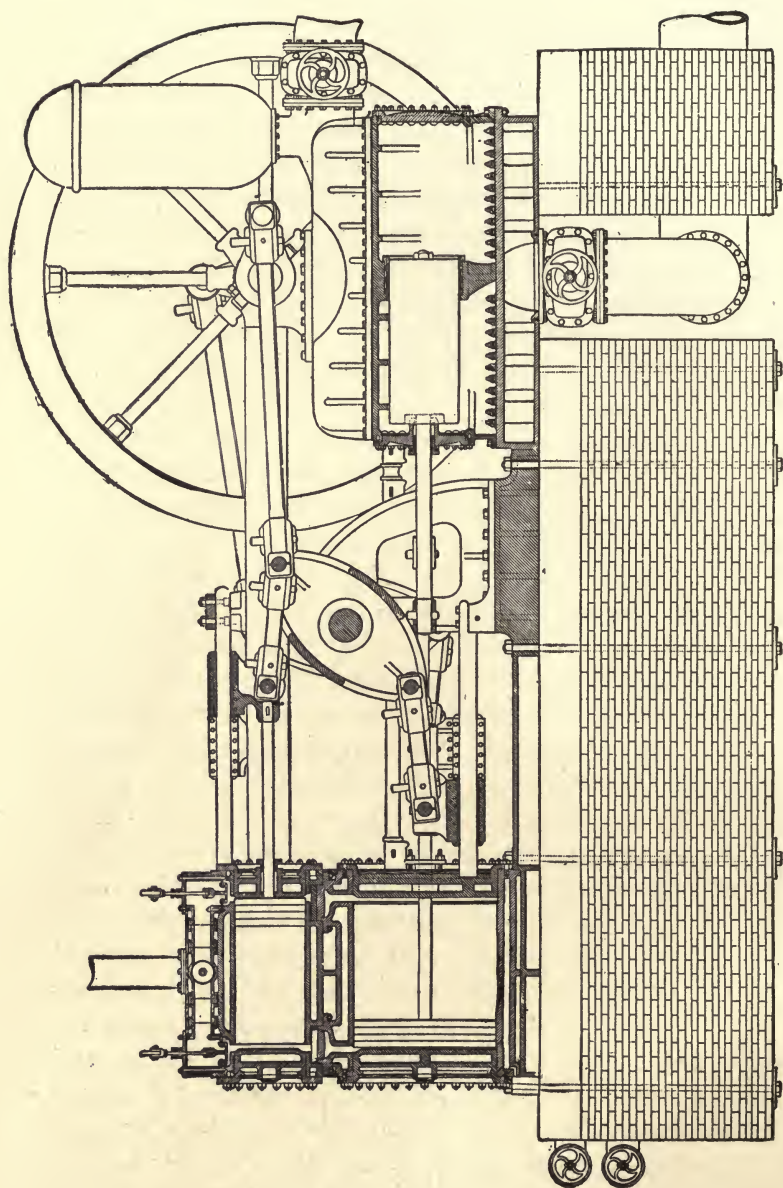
Gaskill Horizontal Compound Pumping Engine, Sectional.
